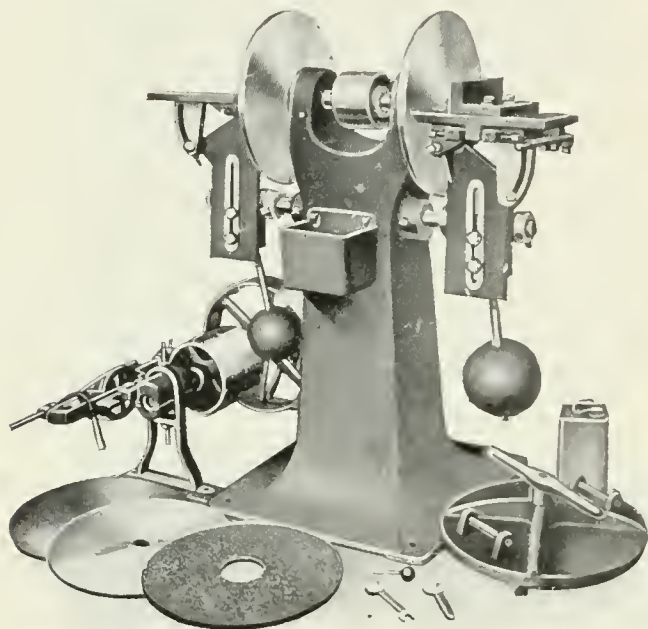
Rowbottom Ball-bearing Disk Grinder
